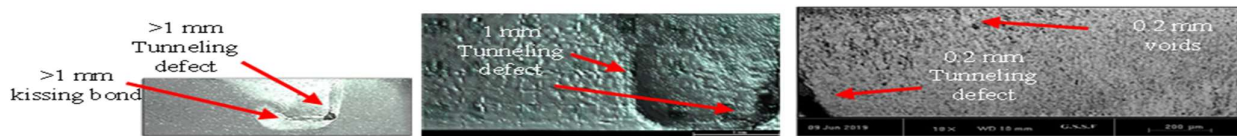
Macro/Micrographs of the surface of friction stir welding sample for threaded taper pin profile (run # 11).
